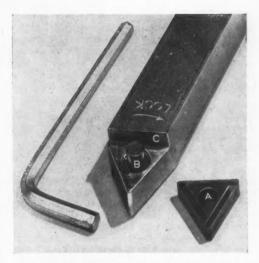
The Tip is Securely Held in the Holder by the Locking Action of an Eccentric-ended Socket Head Screw
